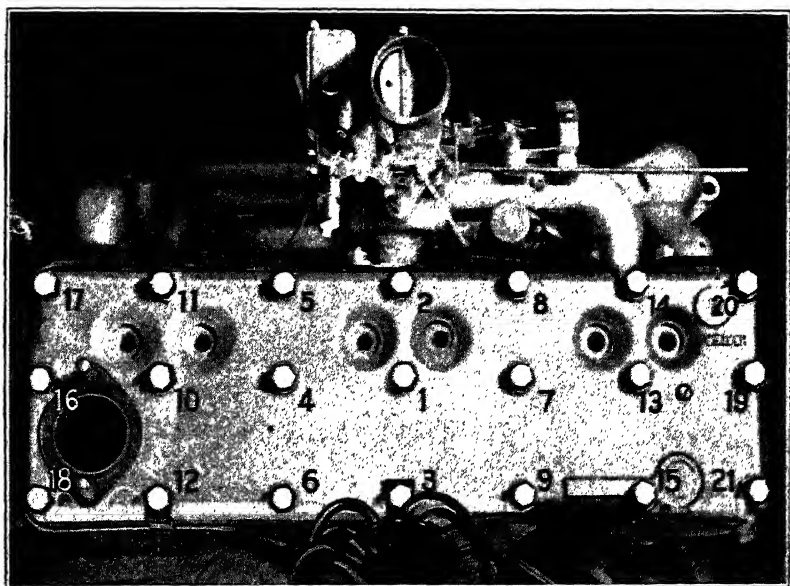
Chrysler Cylinder Showing Order in which Cylinder Head Bolts or Stud Nuts Should Be Tightened
